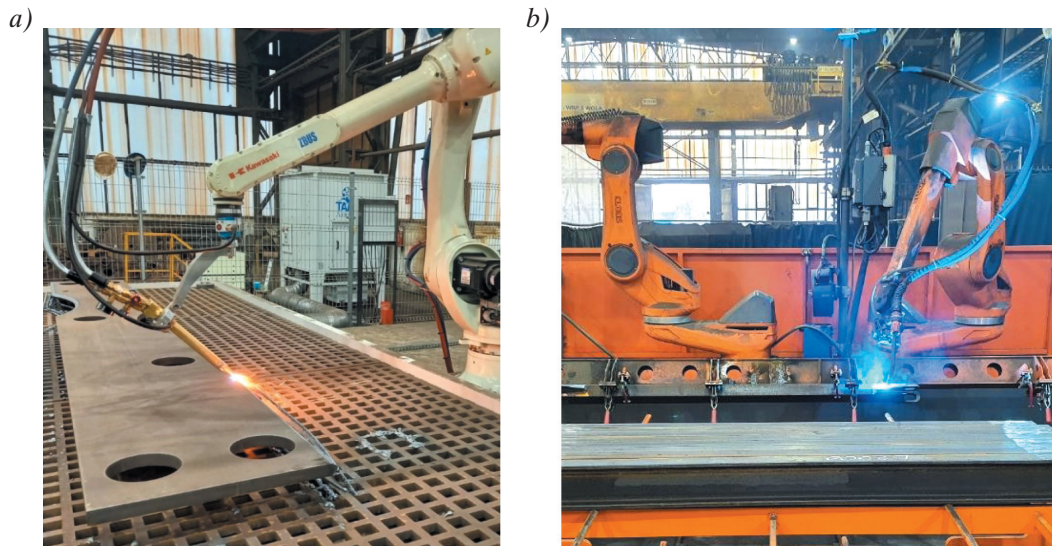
Example of the use of welding robots for: a) chamfering metal sheets; b) welding of structures
